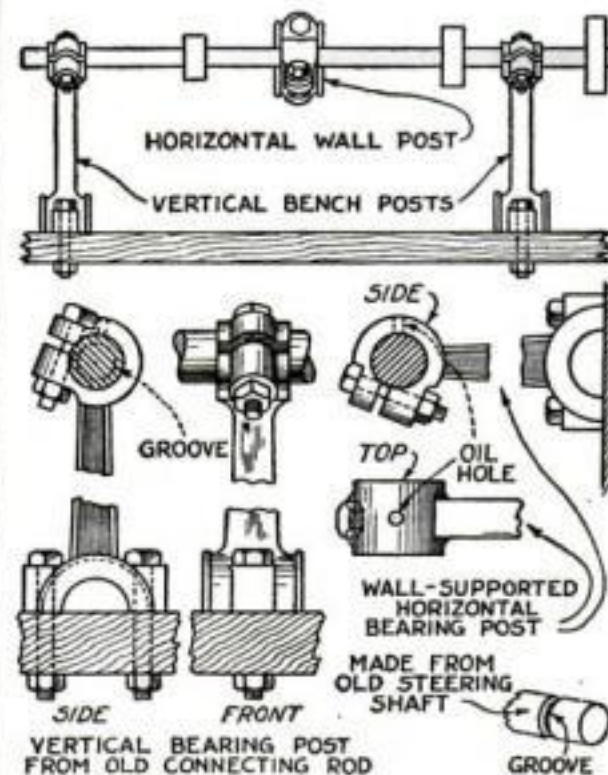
The complete countershaft and details showing how the connecting rods are used.
